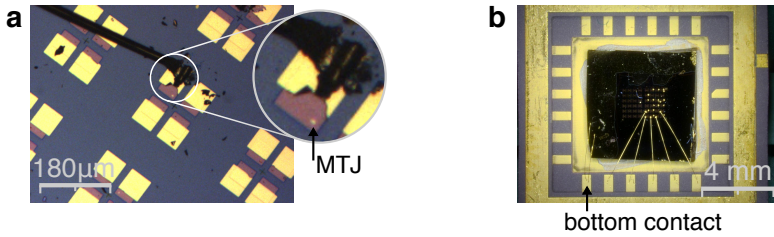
Sample in IC bond socket: Microscopy images of, a a wedge bond placed on top of a gold contact pad, connected to a single MTJ. The MTJ is still optically accessible, and b the sample with the bottom contact (left pin) and several MTJs connected to the socket.
